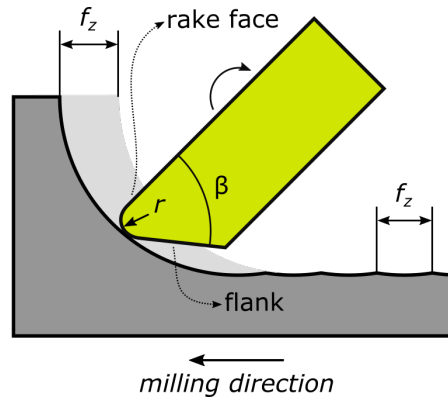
Illustration of the tool parameters wedge angle β and cutting edge radius r along with single tooth feed f_z and milling direction.
